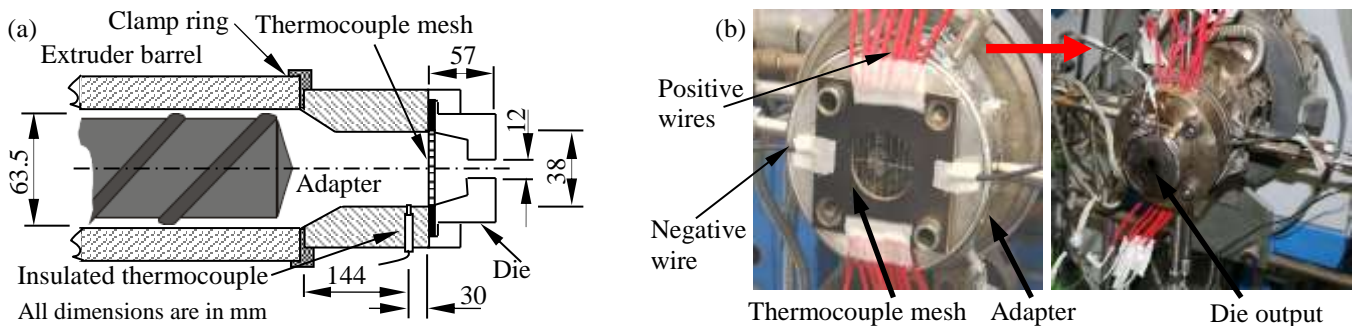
(a) - Arrangement of the apparatus with its dimensions, (b) - Images of the thermocouple mesh placement.
